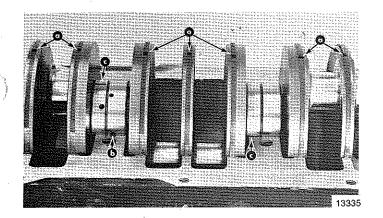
Main Bearing Cages and Rollers Installed in Main Bearing Race Halves
